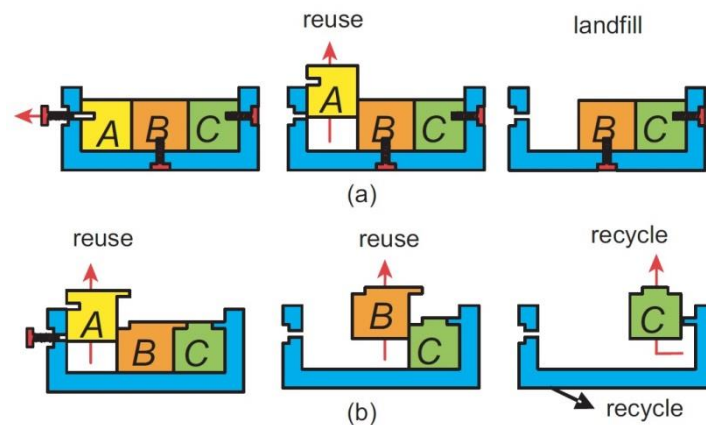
Self-disassembly concept proposed by Takeuchi [Takeuchi, 2006] (a) conventional assembly; (b) assembly design for product-embedded disassembly
